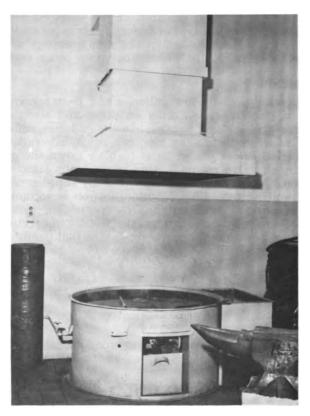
Adjustable hood over machine shop forge—Fontana.
